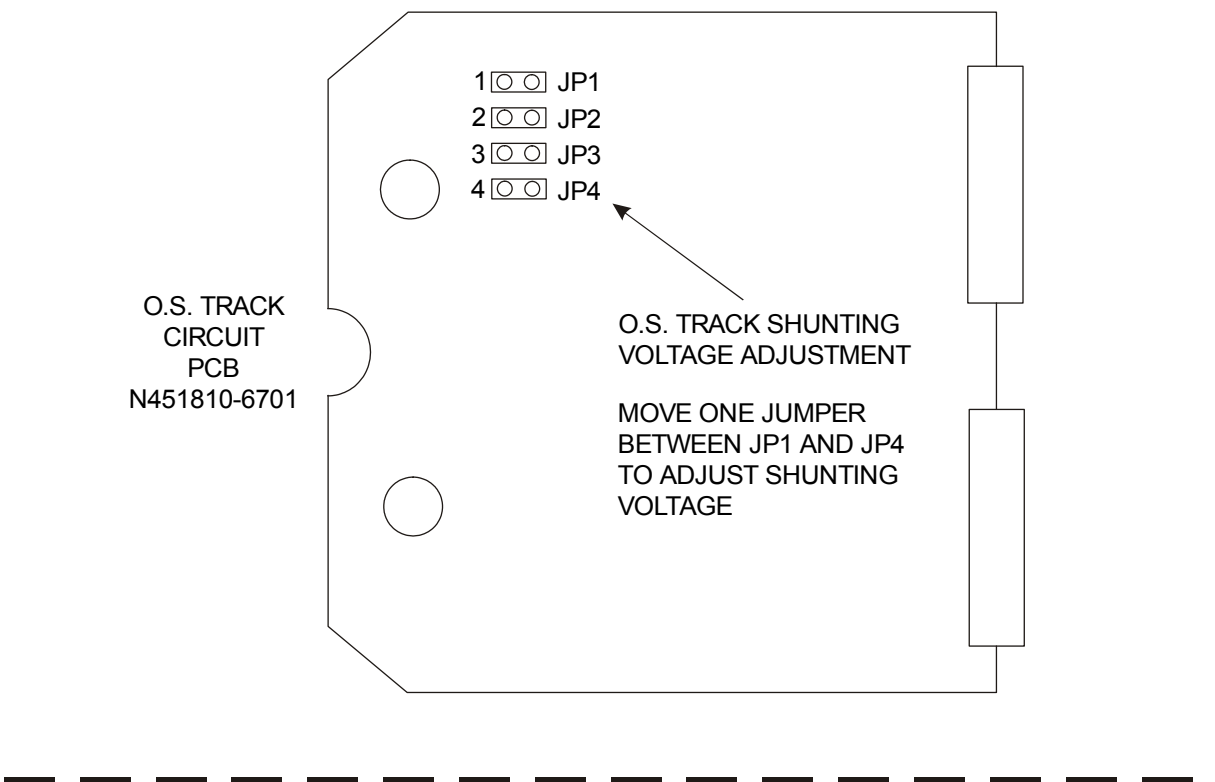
OS Track Circuit PCB Shunting Voltage Adjustment (Jumper)
